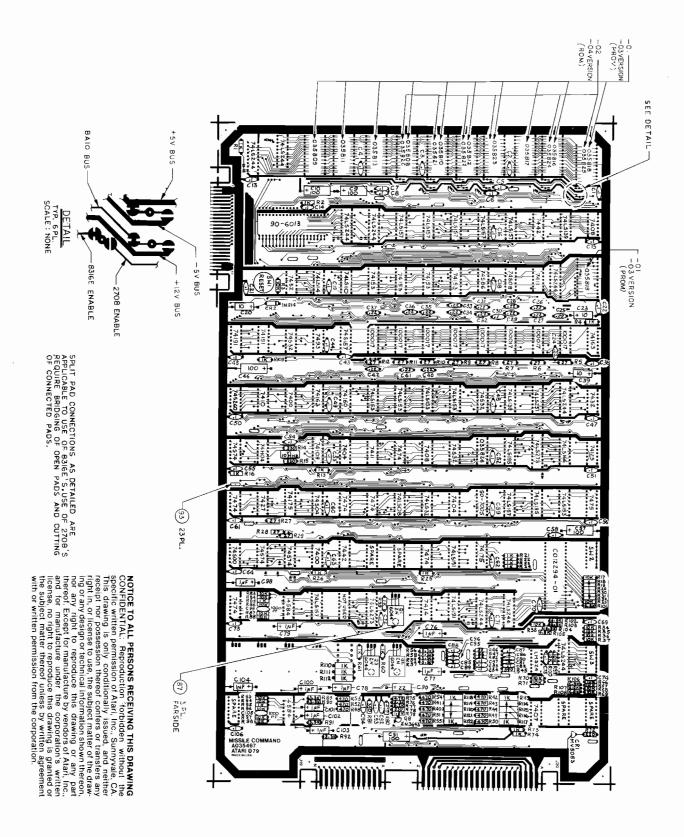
Game PCB Assembly A035467-01 thru -04 D
